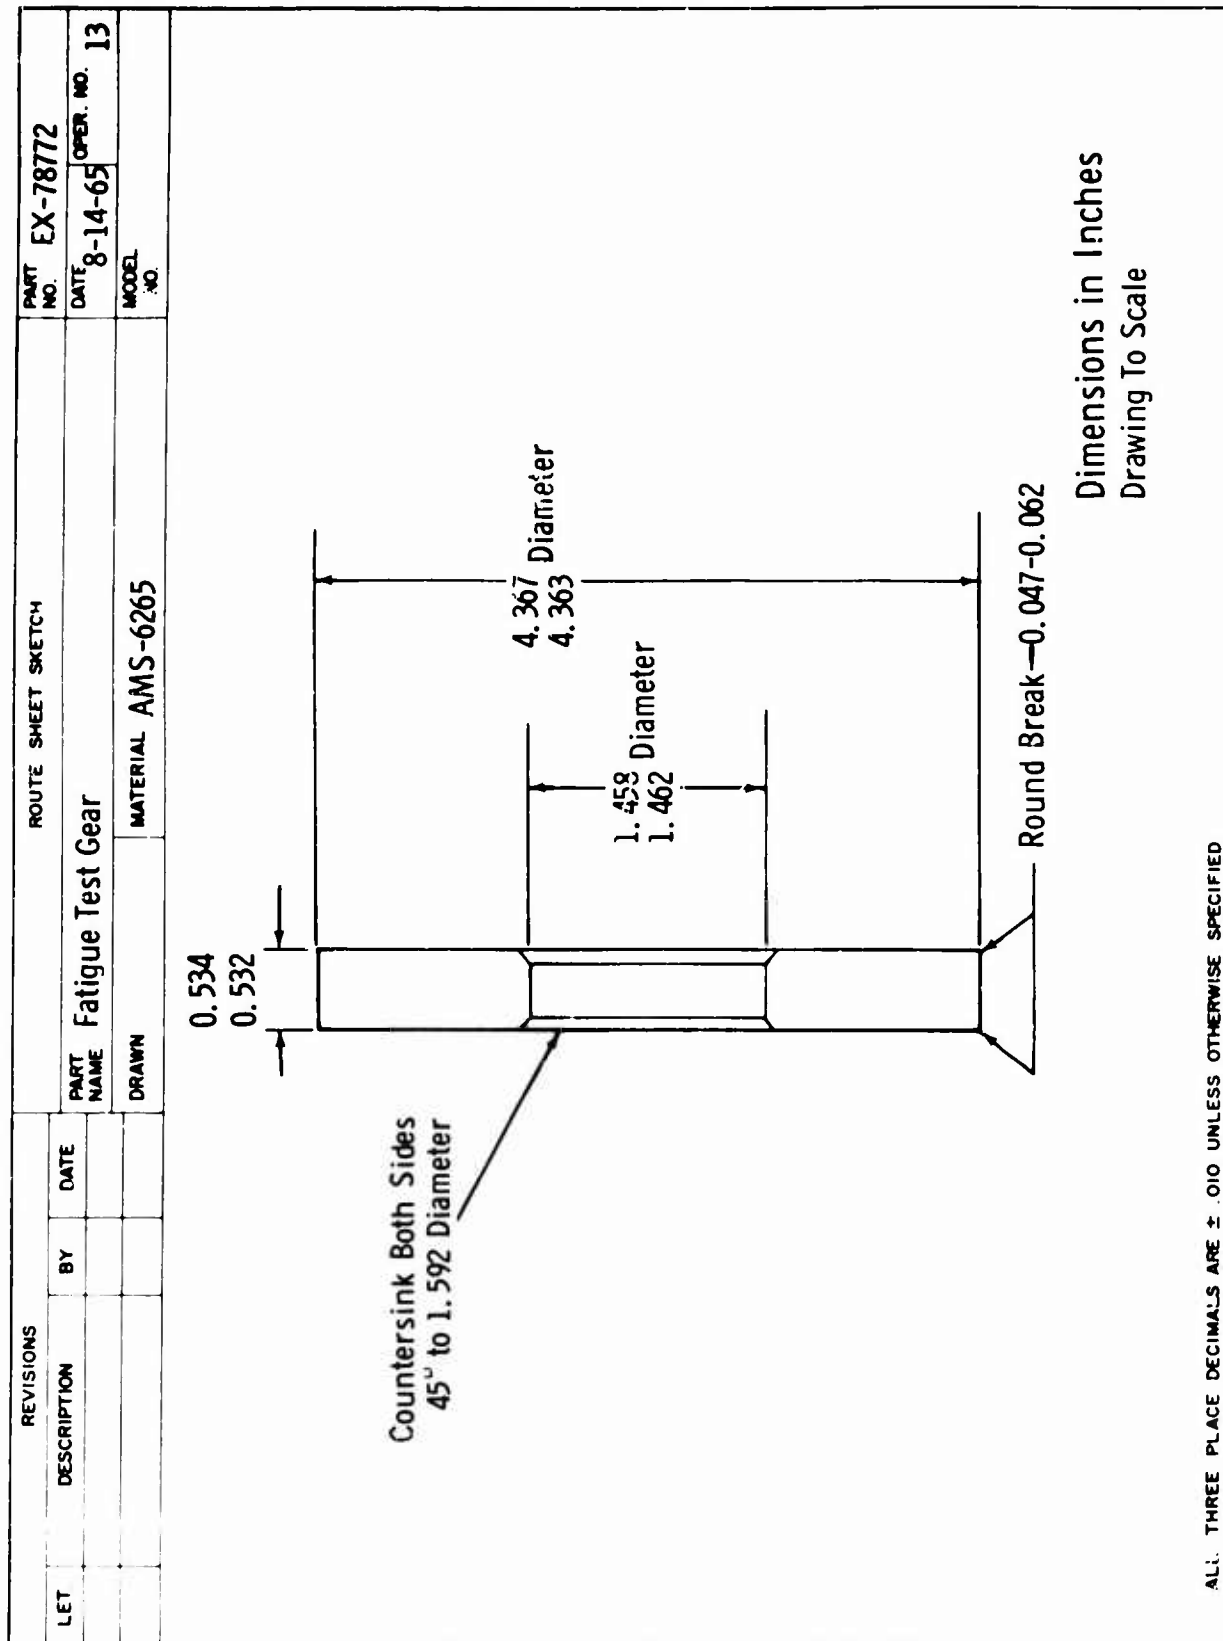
Typical Routing Sheet for Full Form Ground Fillet Gear, EX-78772 (Sheet 7 of 9).
